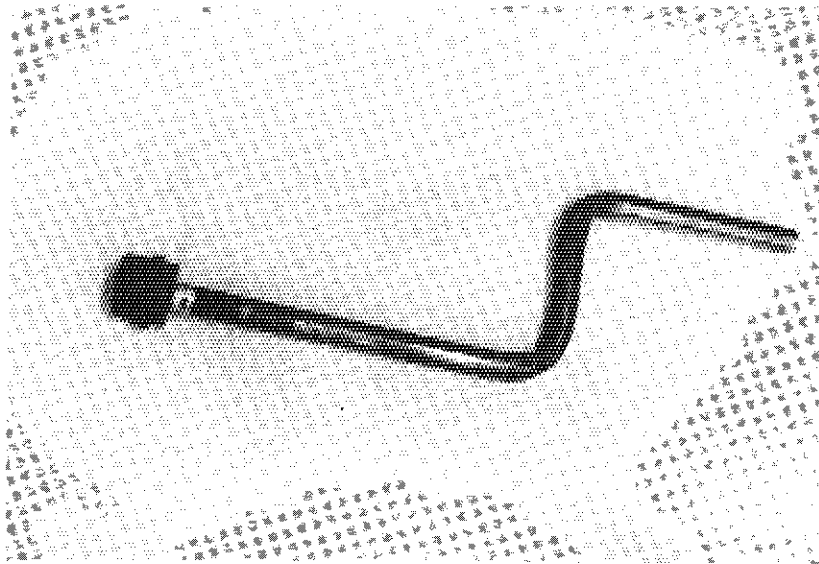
Cranked handle for manual operation of motion transfer shaft
